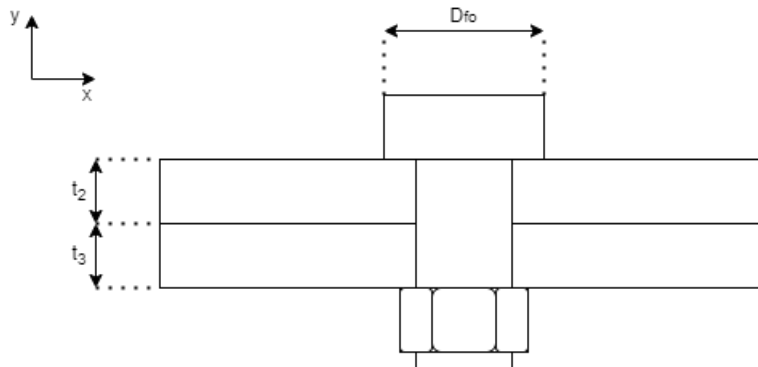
Simplified view of a bolt attaching the lug backup wall to the spacecraft wall
